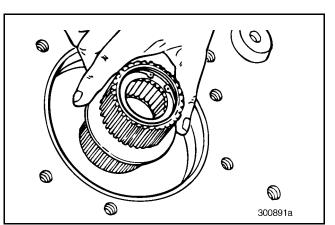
Installing Reverse Gear Mainshaft Snap Ring
